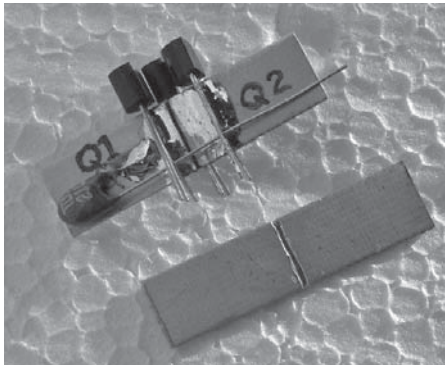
This photo shows how I soldered the collector of the transistors to a piece of circuit board material for thermal stability.
